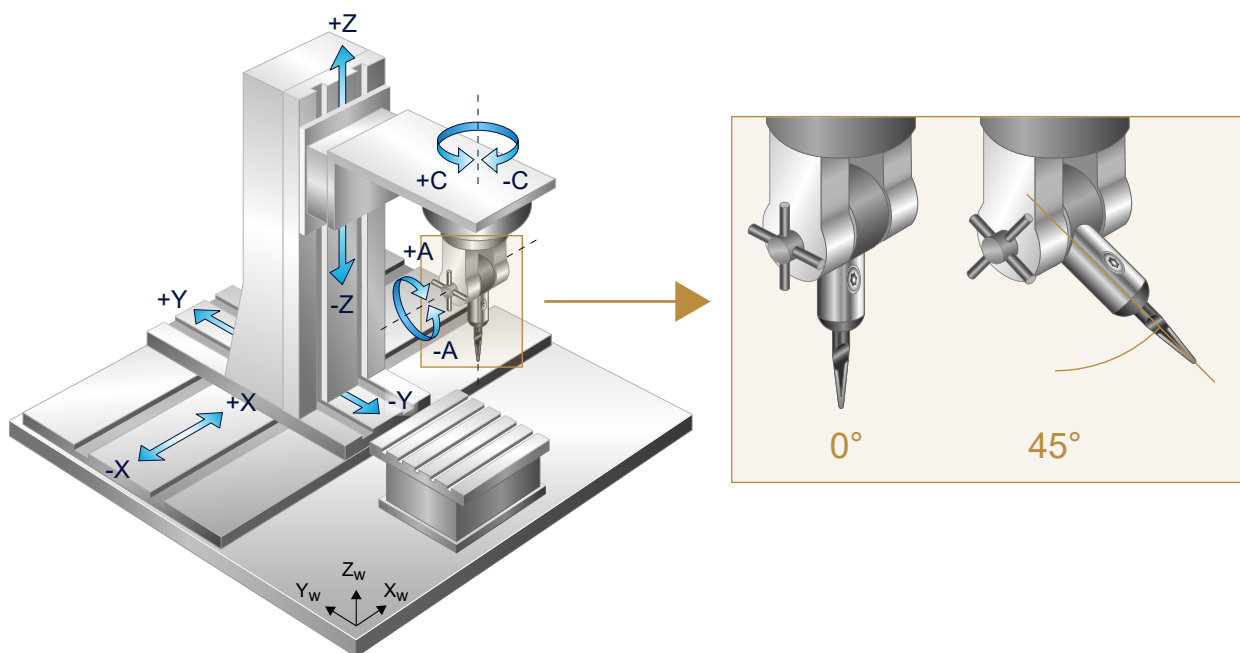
5-axis kinematic (metal cutting tool with manual auxiliary axis A)
